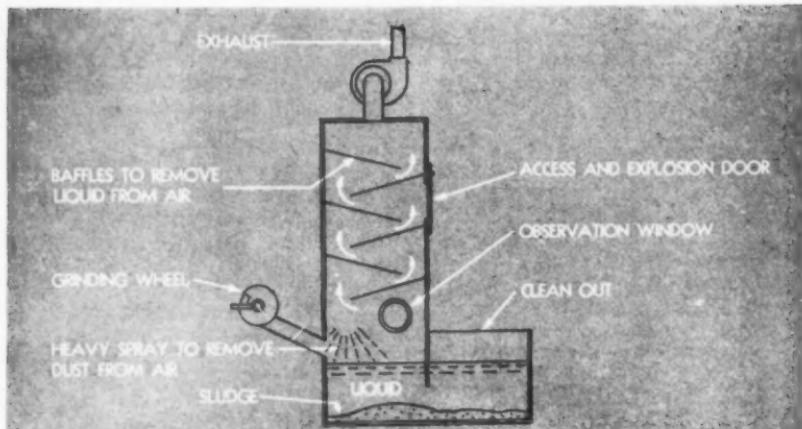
Recommended type of dust collector for use with grinding wheel stands.
